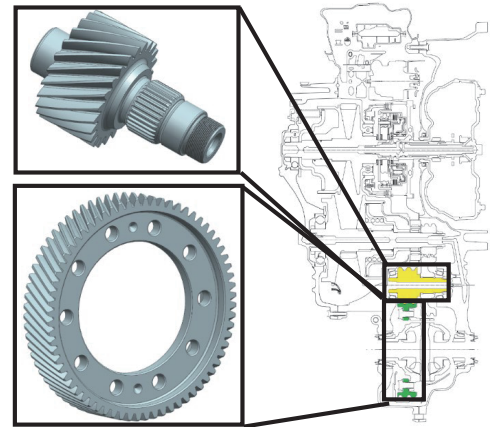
Continuously variable transmission unit for medium to large passenger cars and a second reduction gear pair.
